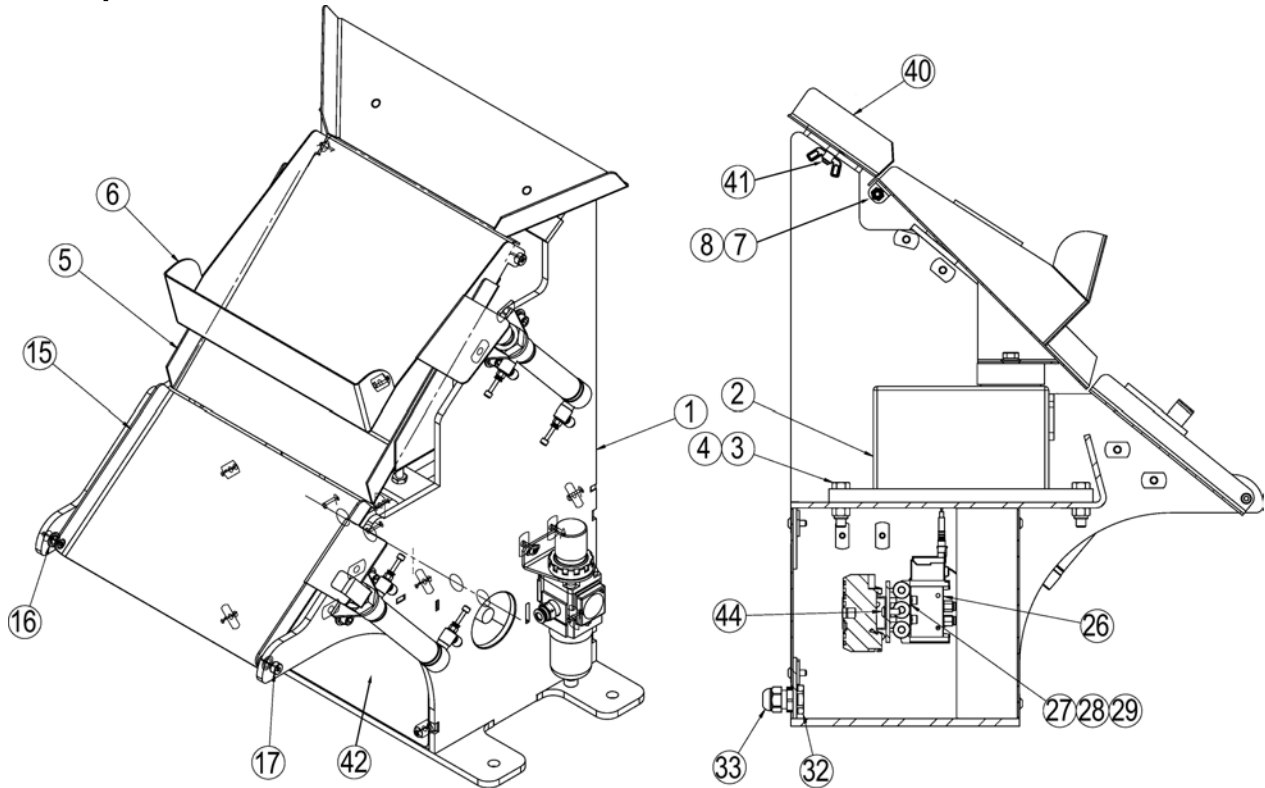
Cascade Scale Assembly, Painted Mild Steel
